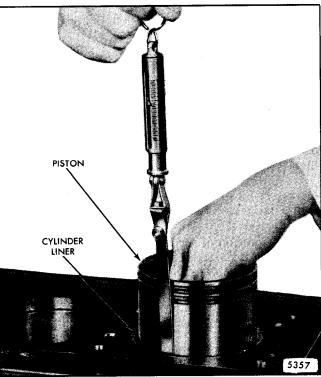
Measuring Piston-to-Liner Clearance with Tool J 5438-01
